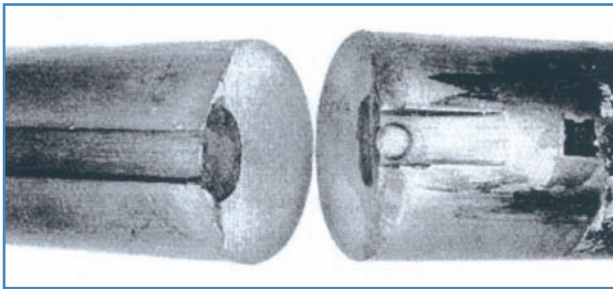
shaft failure due to fatigue crack (heat treated steel C45)
